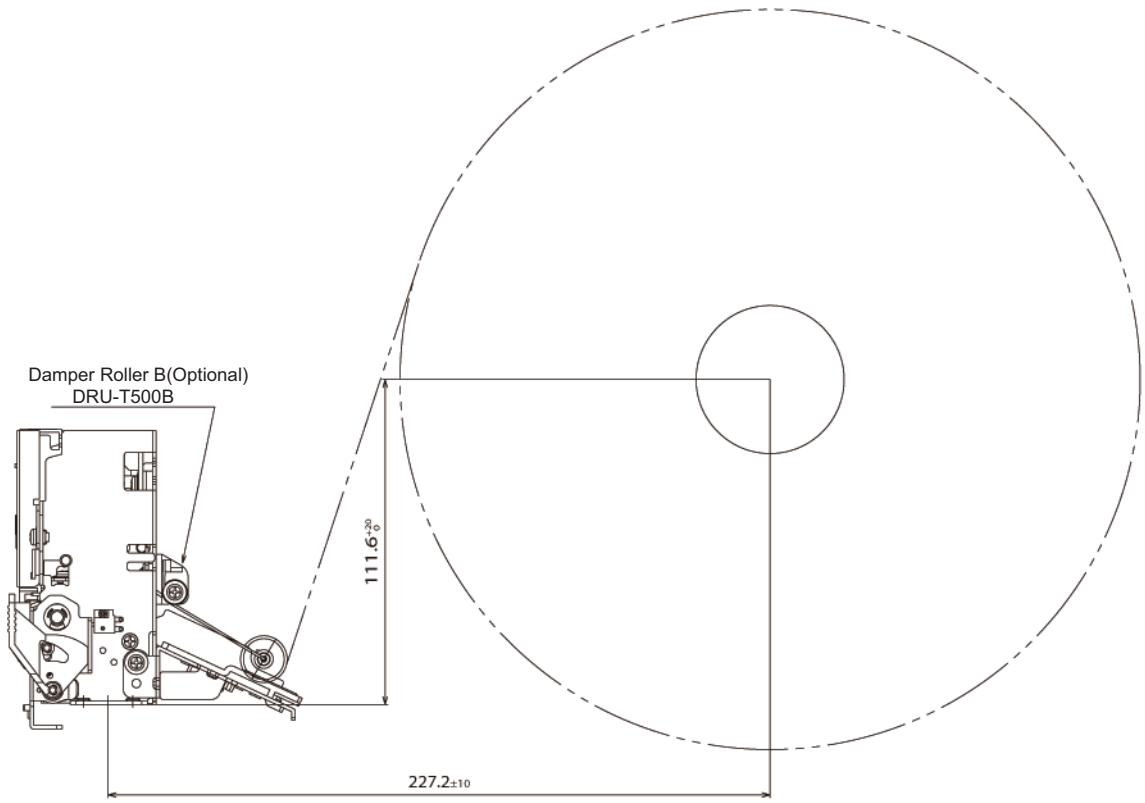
A External View and Dimensions of the Printer Mechanism
